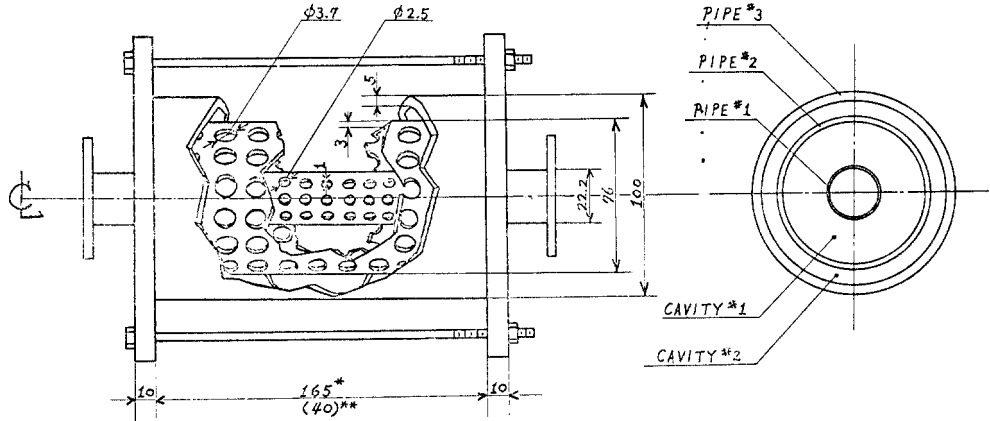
TESTED 3-PIPE RESONATOR SHAPE AND DIMENSION - A CUT-AWAY VIEW
